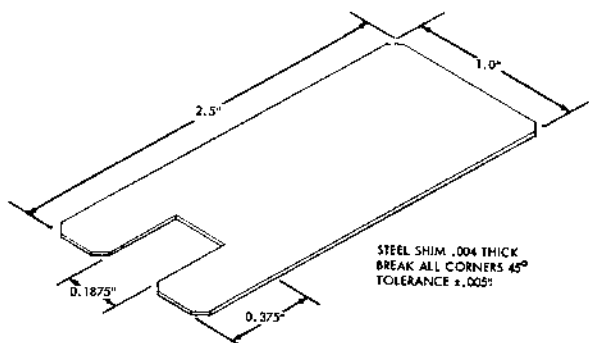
Feeler Gauge (Tool No. T-38000-Y)
